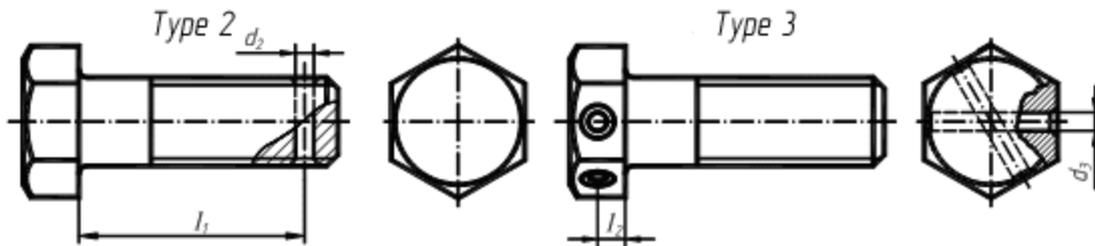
Hexagonal headed bolt (type 2 and type 3)
